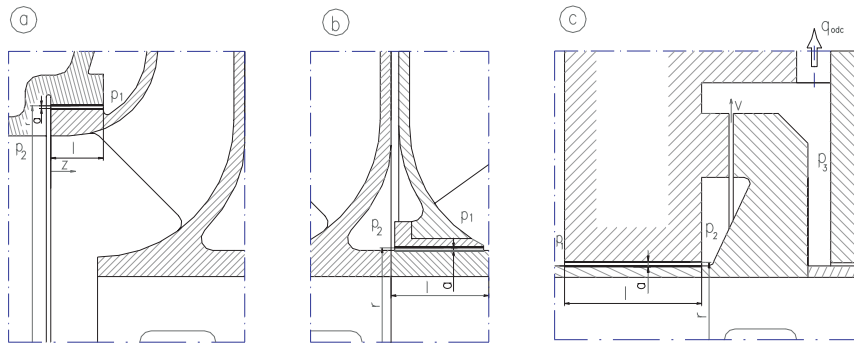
Longitudinal clearances of centrifugal pumps: a) impeller neck, b) stage wheel, c) balance disk set for axial force.
